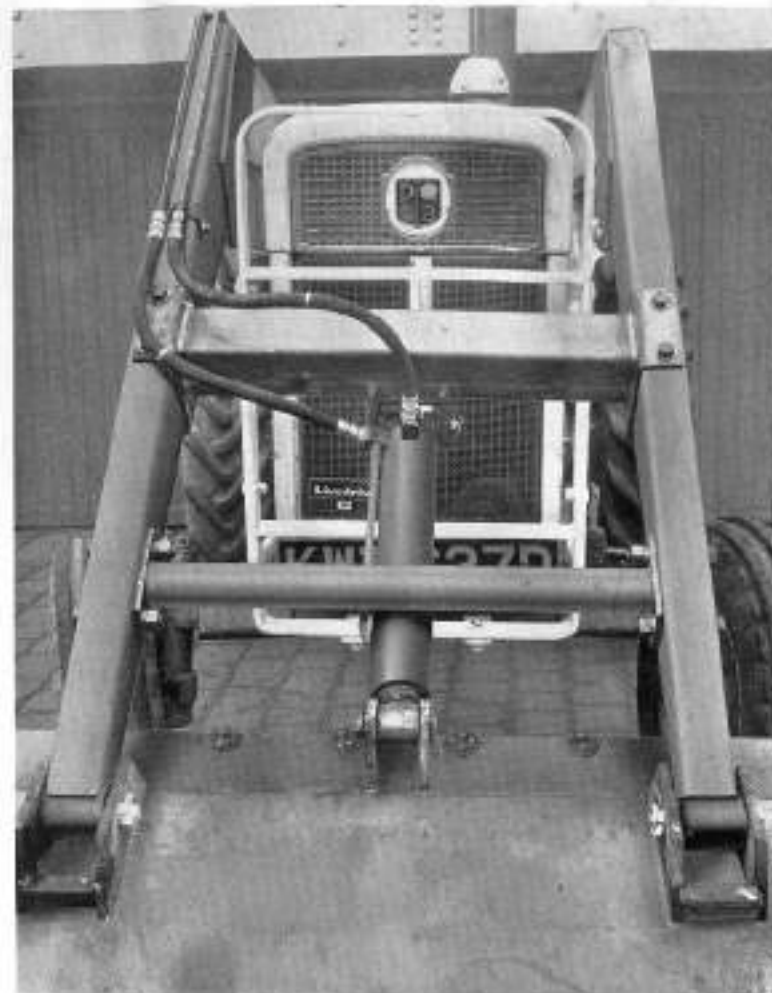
FITTING OF DUMP RAM AND BUCKET
